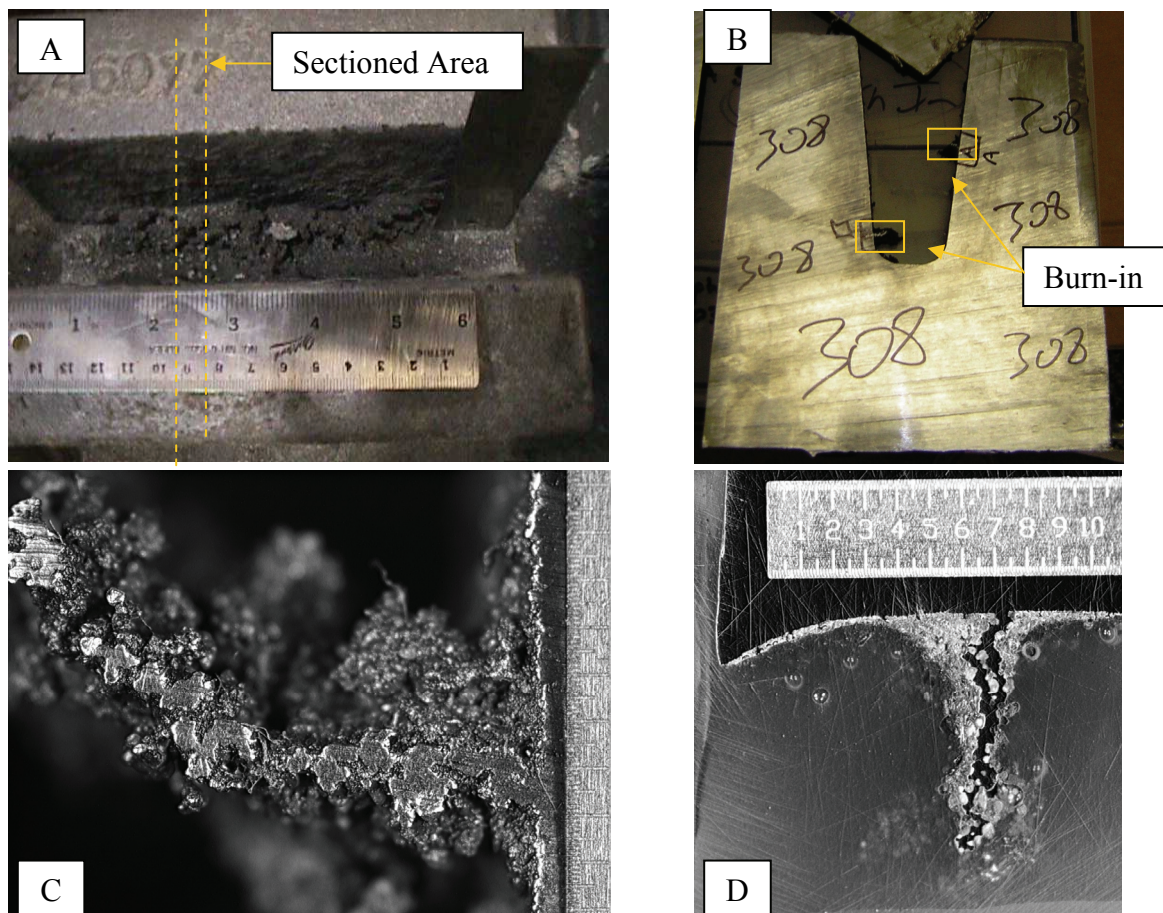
Large v-block casting (A), section of casting (B), macro-image of burn-in (C) and an epoxy mounted burn-in defect (D)
